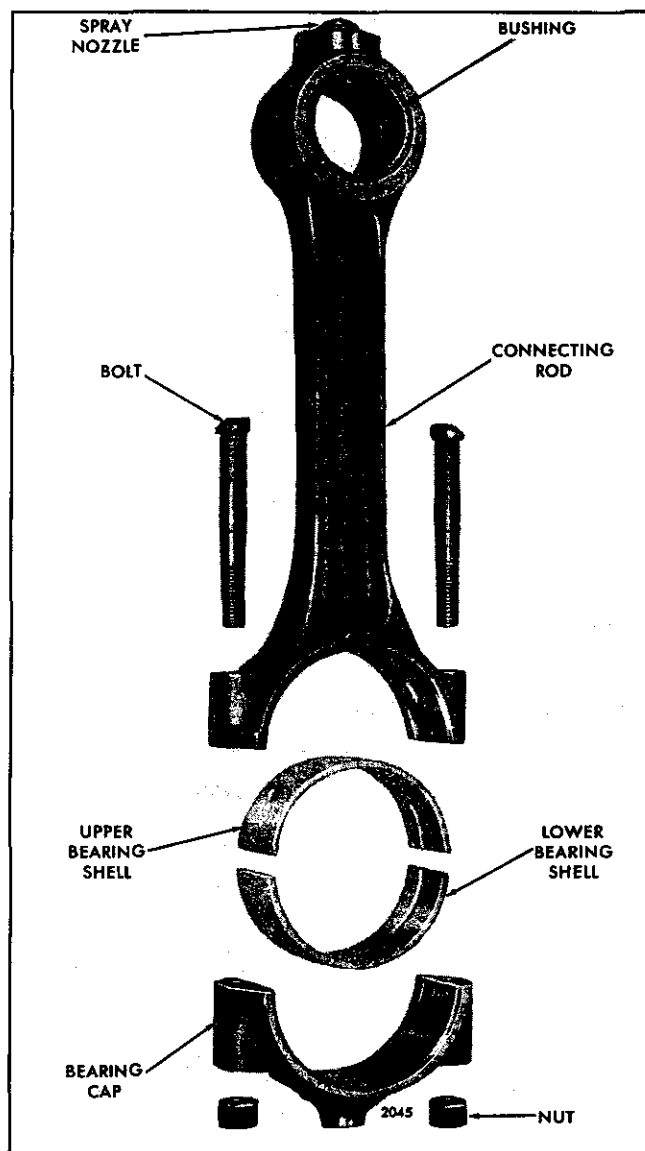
Connecting Rod Details and Relative Location of Parts
